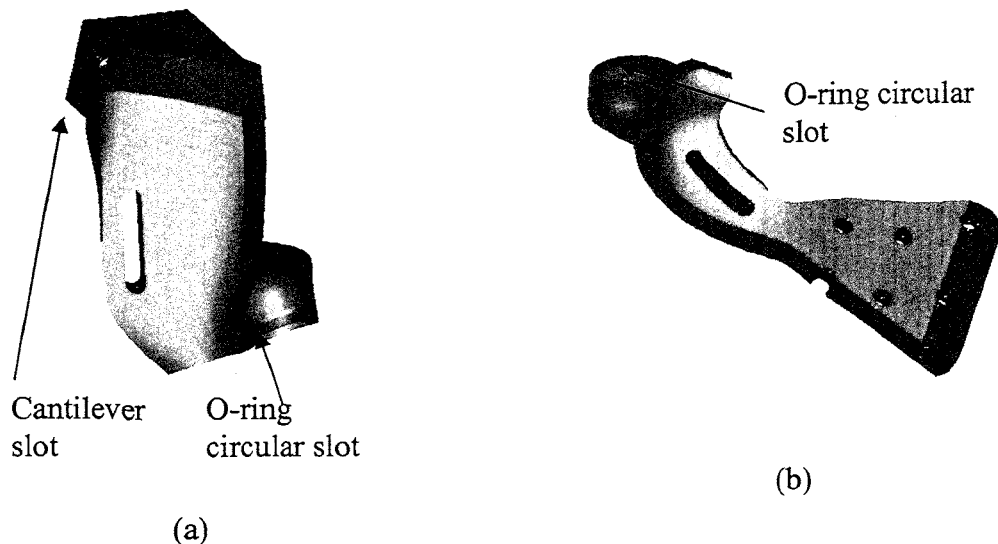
Sectional view of above right clubfoot AFO showing arrangement for fixing mechanical elements (a) upper part (b) lower part
